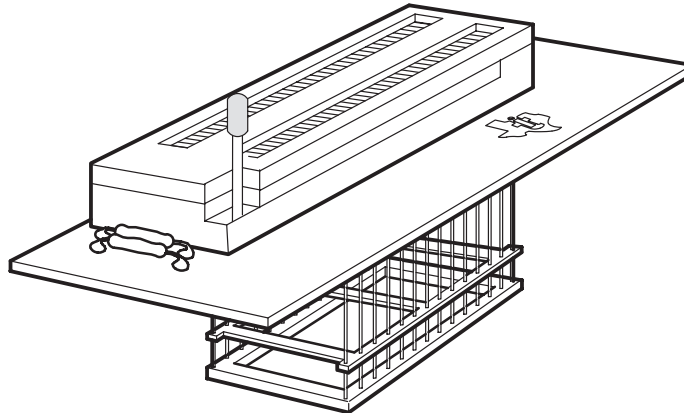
EPROM Adapter Socket (40-pin to 28-pin DIP Conversion)
